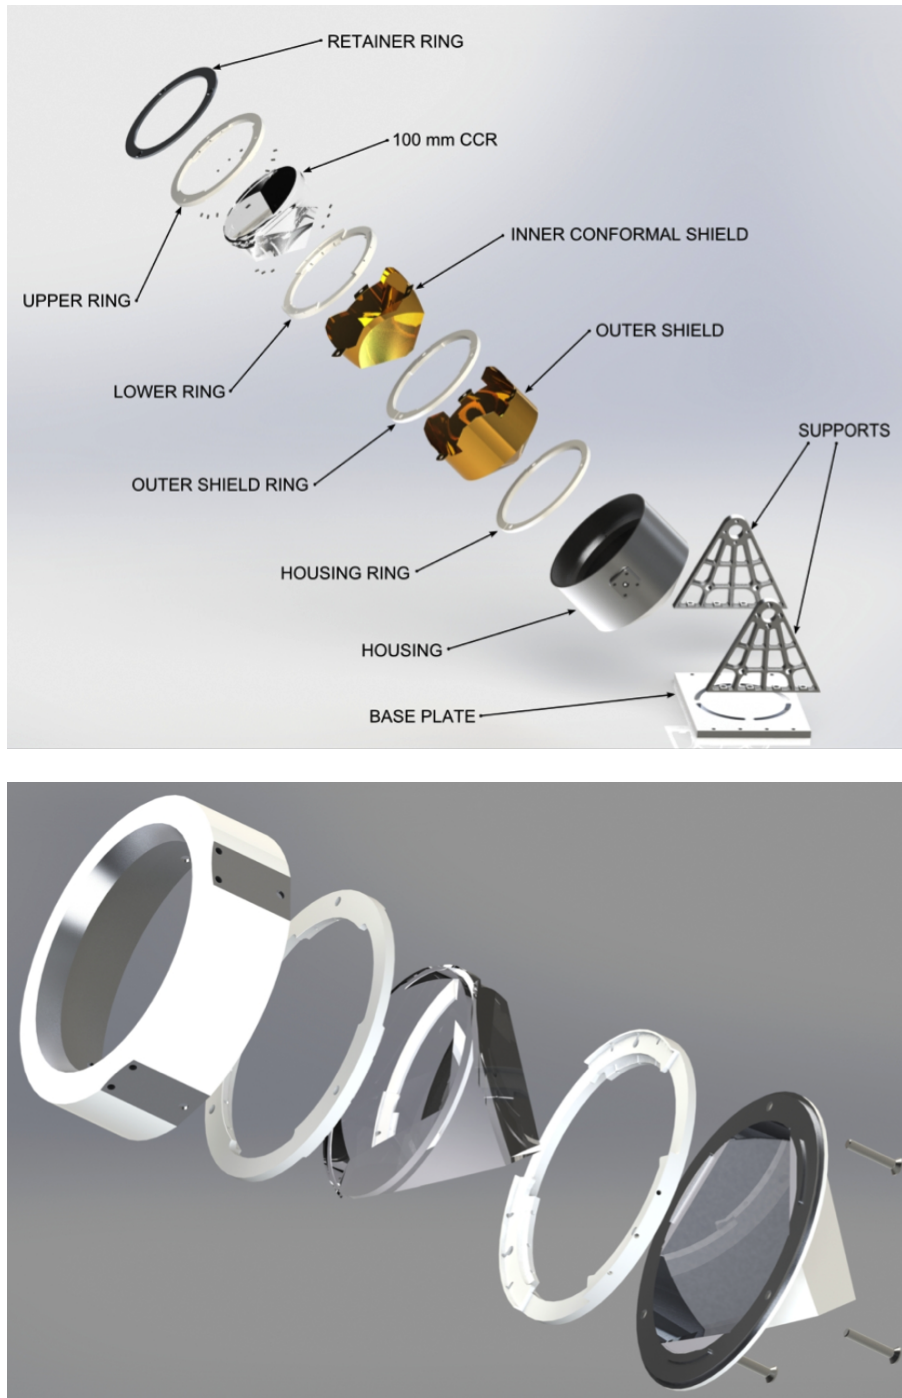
Top: Full bracket assembly exploded view of the old mounting system. Bottom: Exploded view full assembly of the back-mounting conformal housing of the new mounting system
